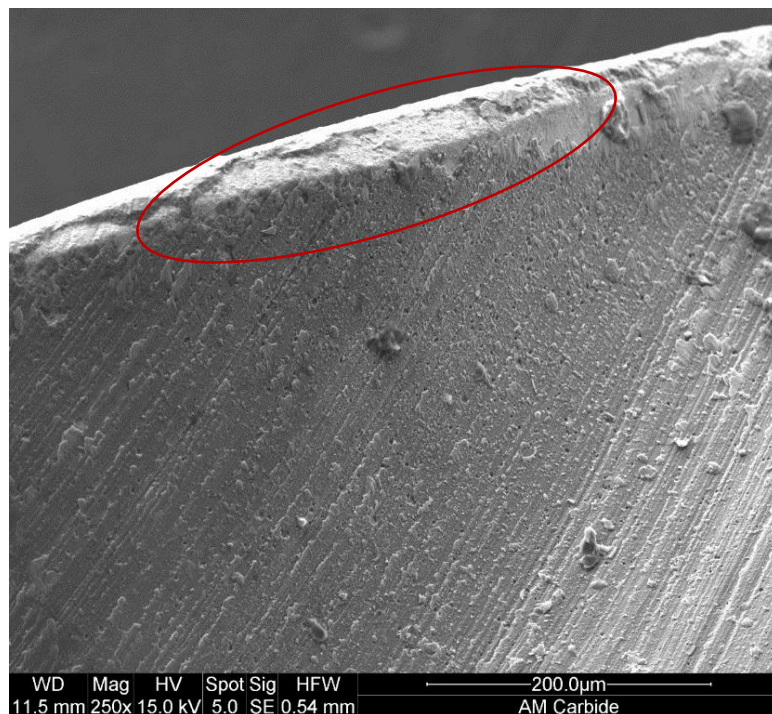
250x SEM flute view of the carbide drill bit cutting edge after drilling 60 holes in AM titanium.
